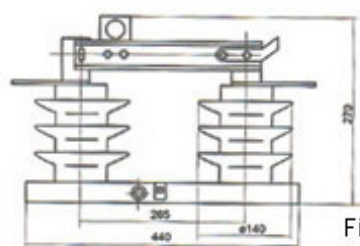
GW9-10 (W) 400 overall / 600 Dimension
